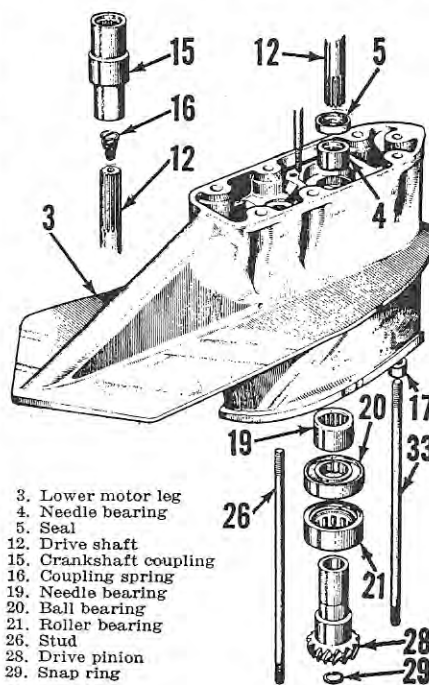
Lower motor leg showing drive shaft, bearings and seals.
